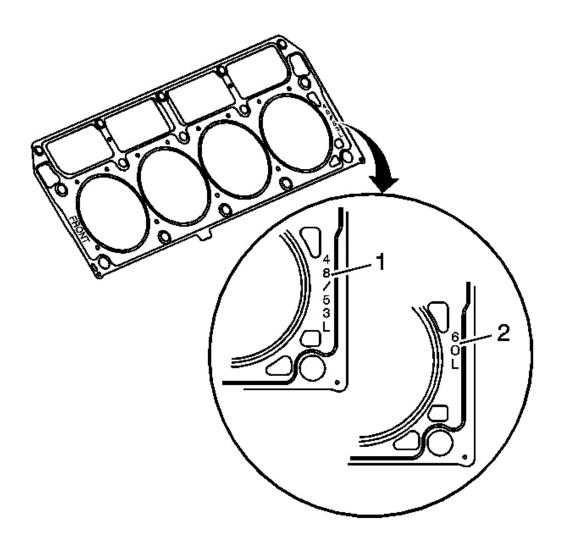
View Of Cylinder Head Gasket Displacement Markings Courtesy of GENERAL MOTORS CORP.
